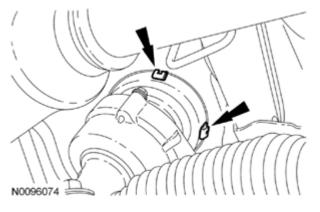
Locating Steering Gear-To-Dash Seal And Clips Courtesy of FORD MOTOR CO.
